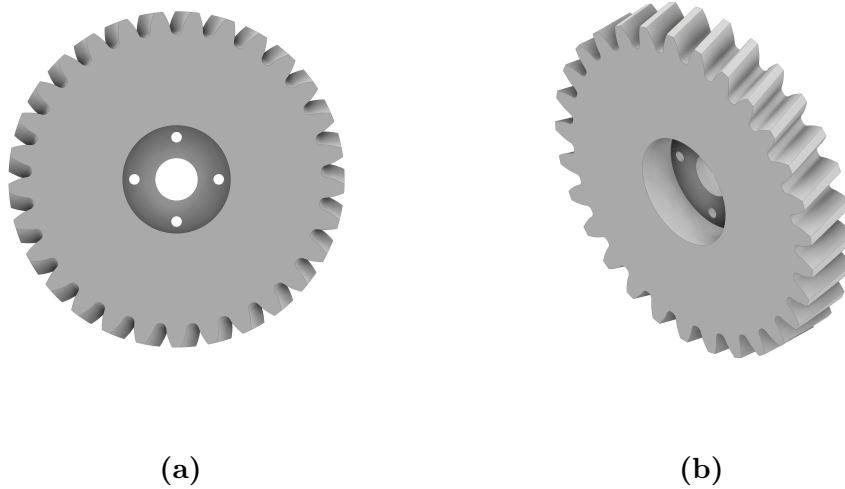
Pinion final design. In (a) is shown the front view of the pinion draft and in (b) is represented an oblique view.
